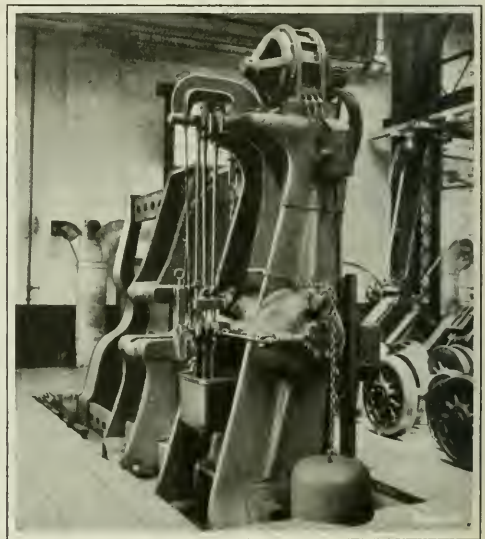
A 660-ton Wheel Press driven by a 25-horsepower Alternating-current Motor
